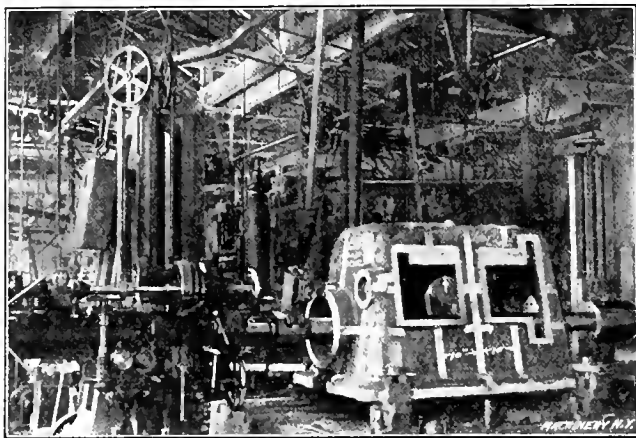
Boring Crankshaft Bearing Holes in a Horizontal Boring Mill
